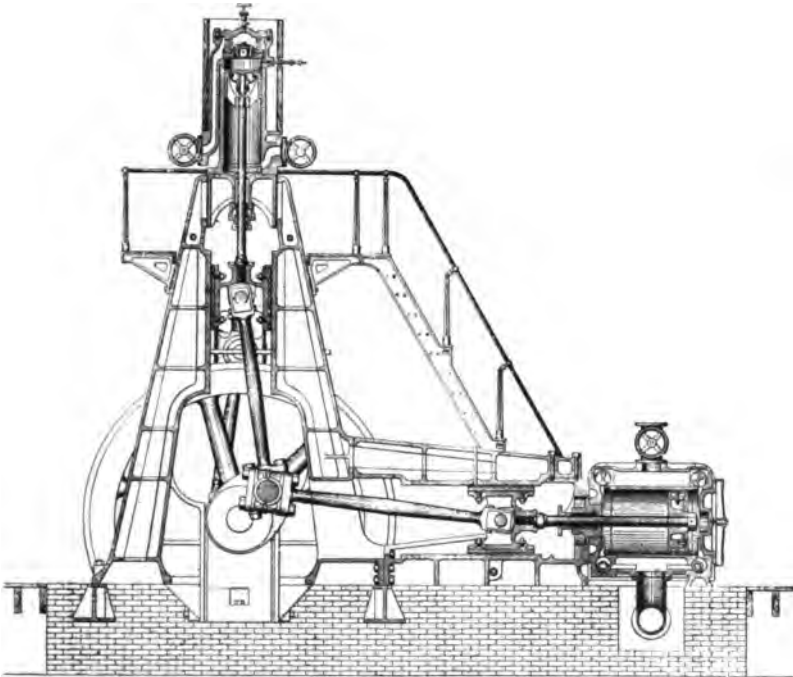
SECTION OF FRICK CO.'S ENGINE AND COMPRESSOR.
